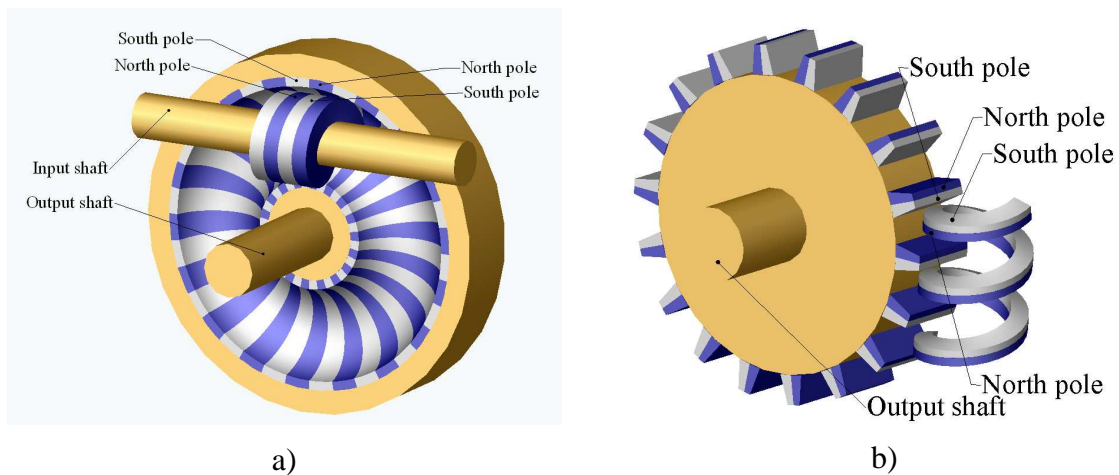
a) Magnetic worm gear with simple geometry [30]. b) Magnetic gear similar to the worm gear type [31].
